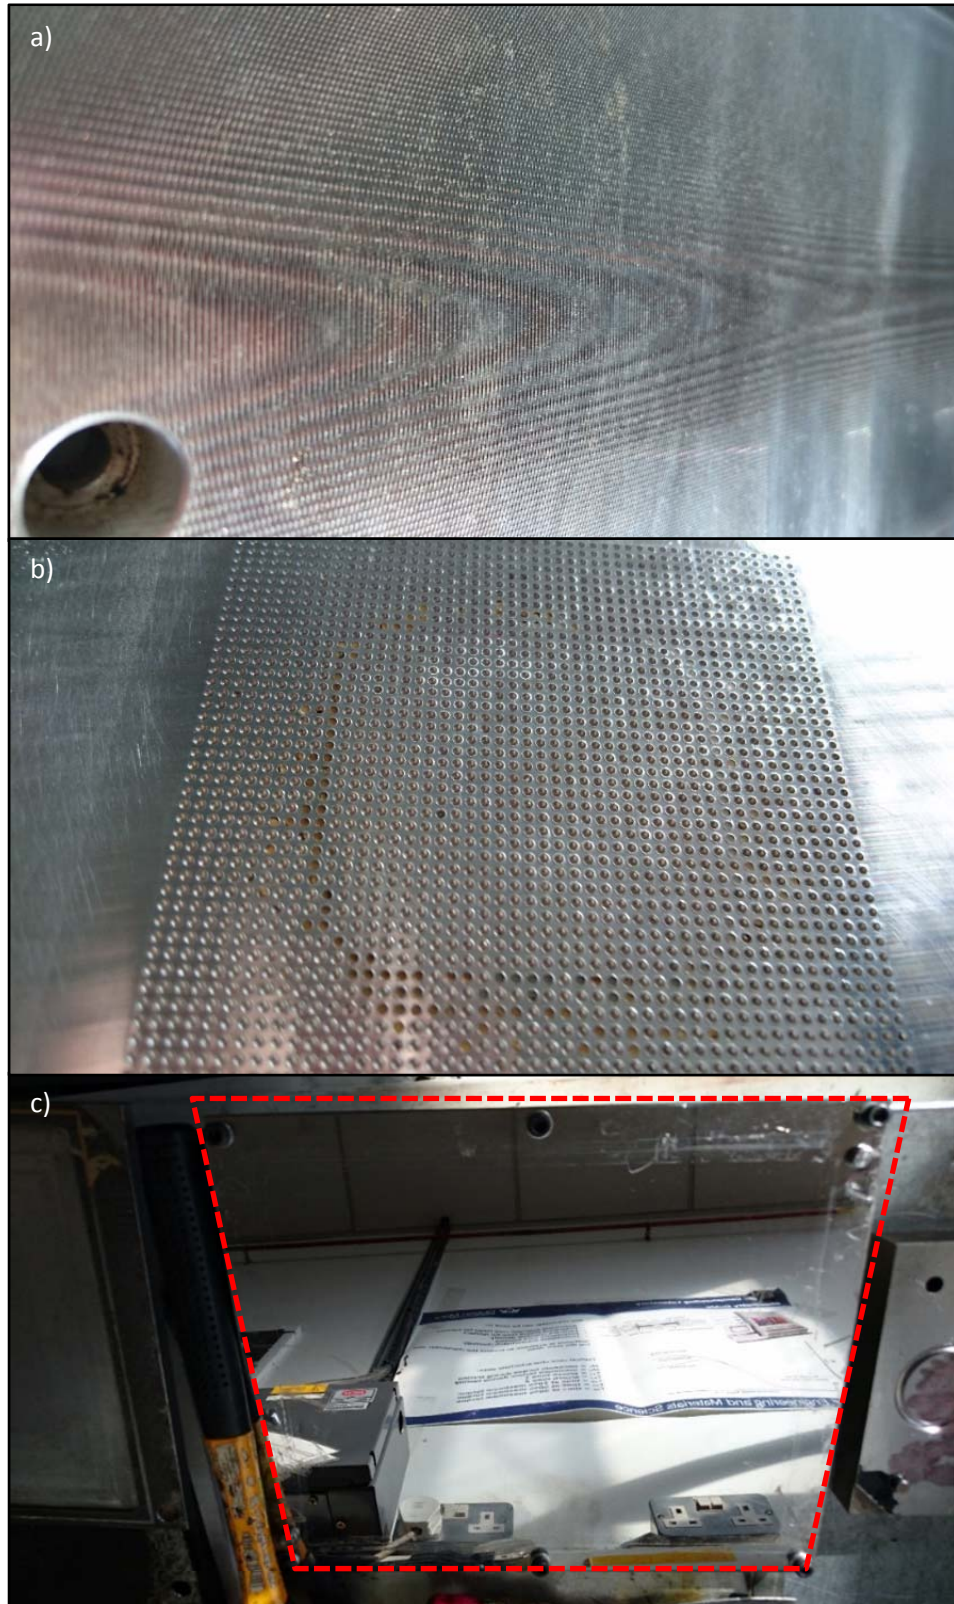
Images of moulds used to create specific surfaces; a) cylindrical asperity mould, b) hemispherical asperity mould, c) flat sheet mould.
